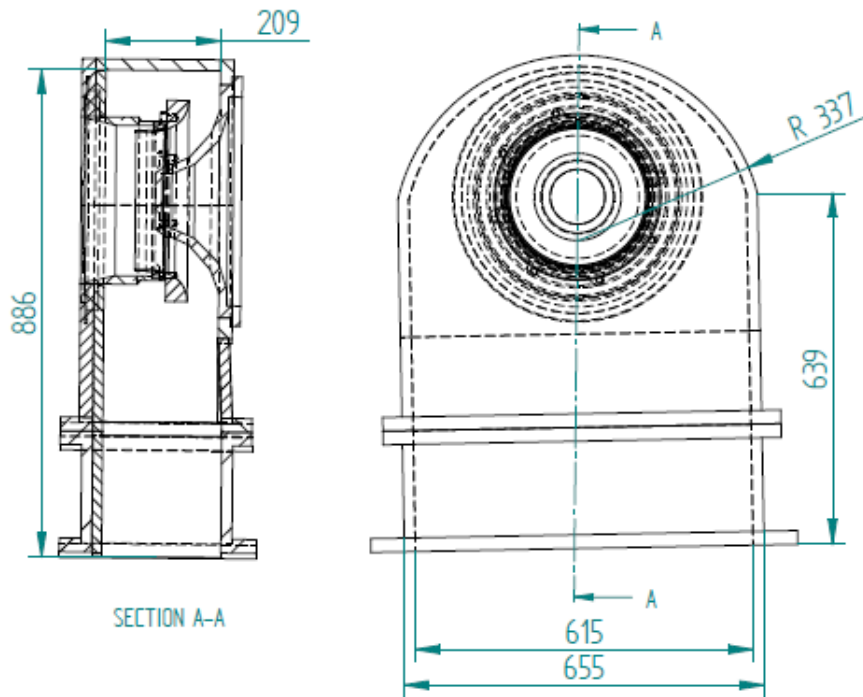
The axial-radial diffuser and exhaust hood model main dimensions in mm
